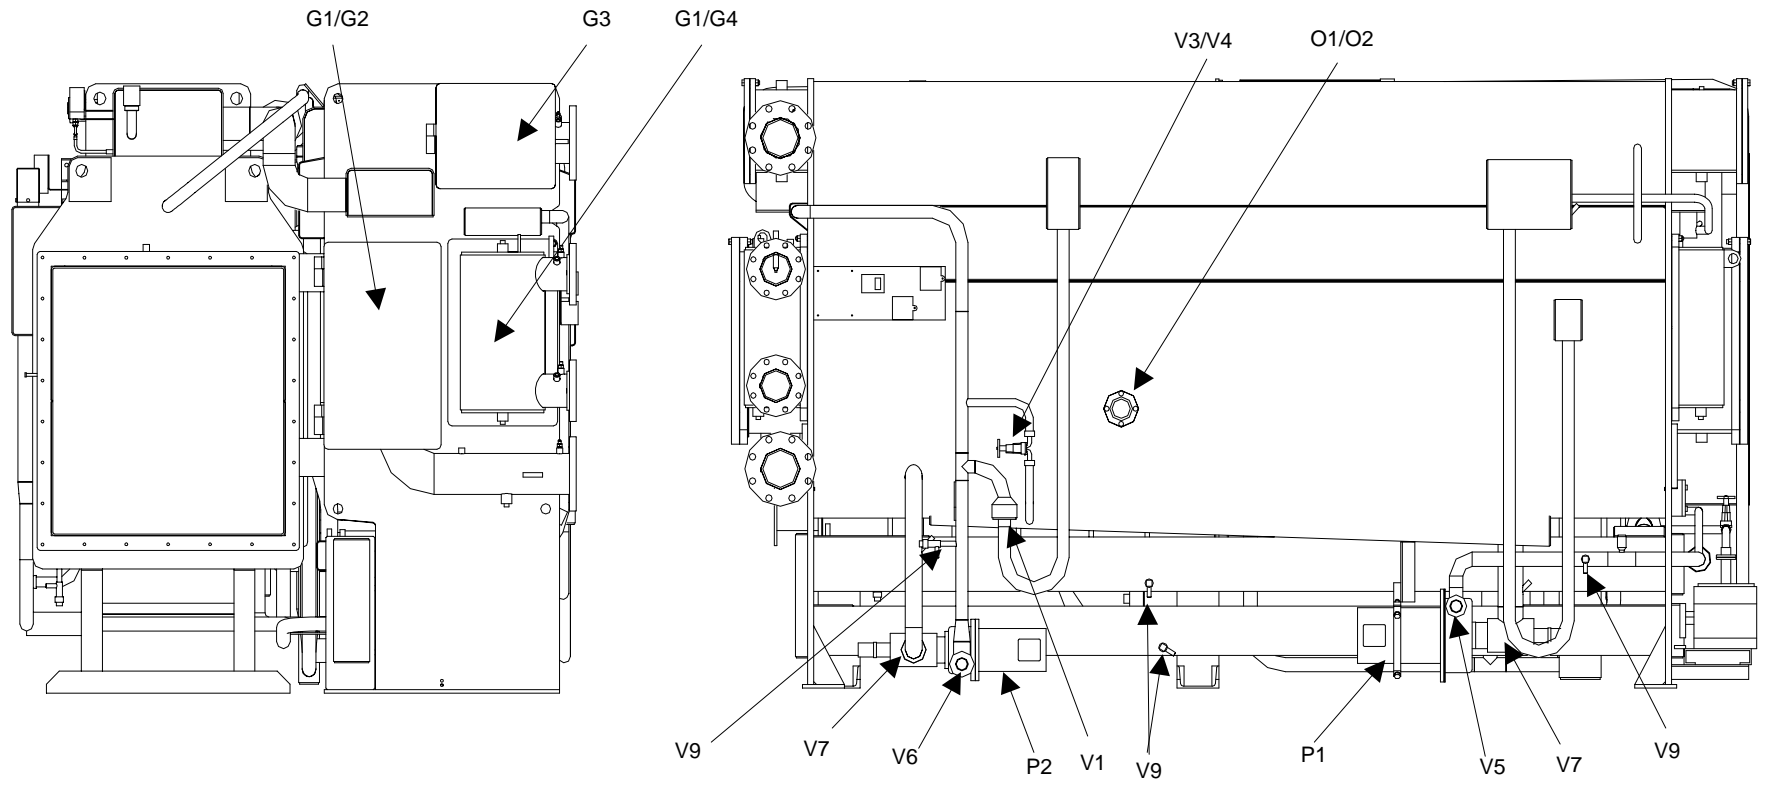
Valve and Components Location, Rear and Side Views (16DNP018 Liquid tube type chiller)
